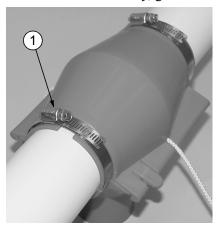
Assembling the Outlet Bottom to the Outlet Top
